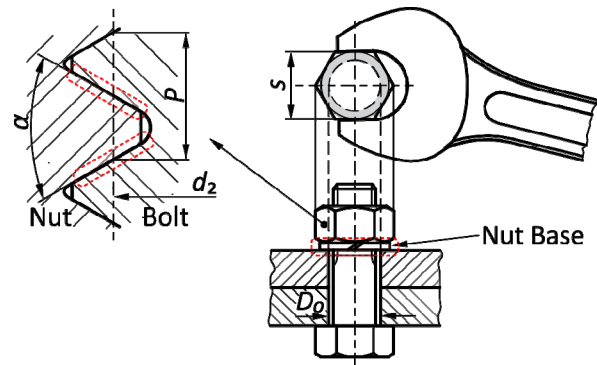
Geometrical characteristics of threaded joint sliding surfaces (denoted with red rectangles)
